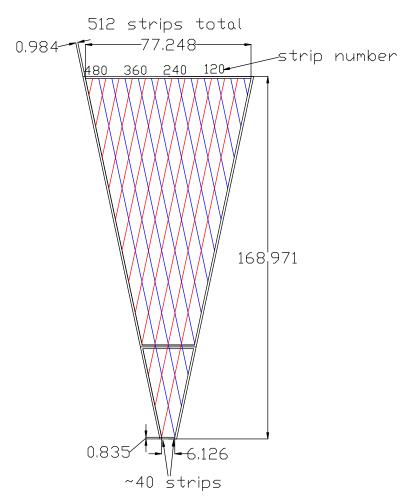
Strip layout for the trapezoidal sensors. All units in mm.
